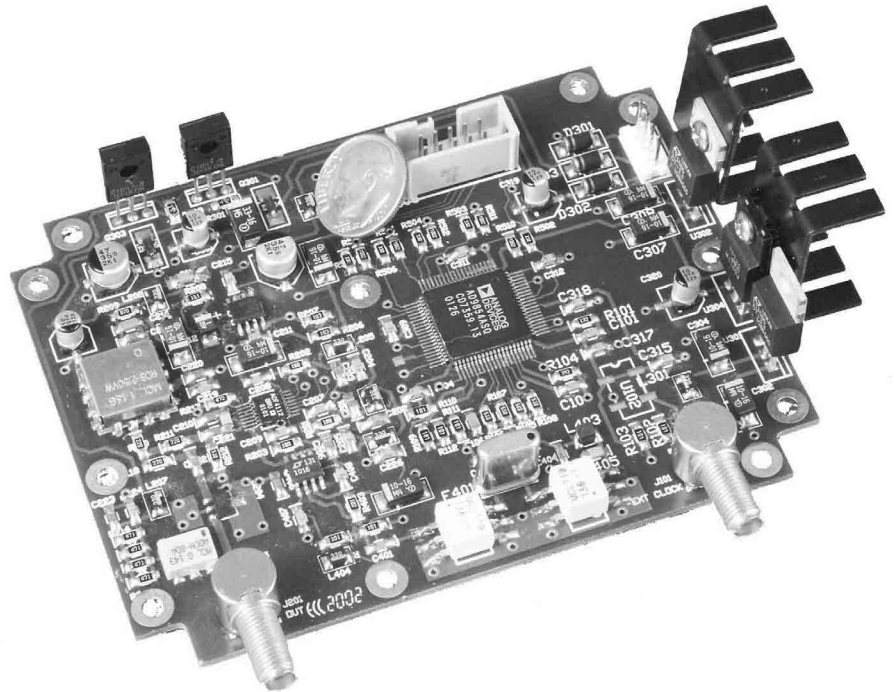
Complete synthesizer PC board with output and external-clock jacks.
